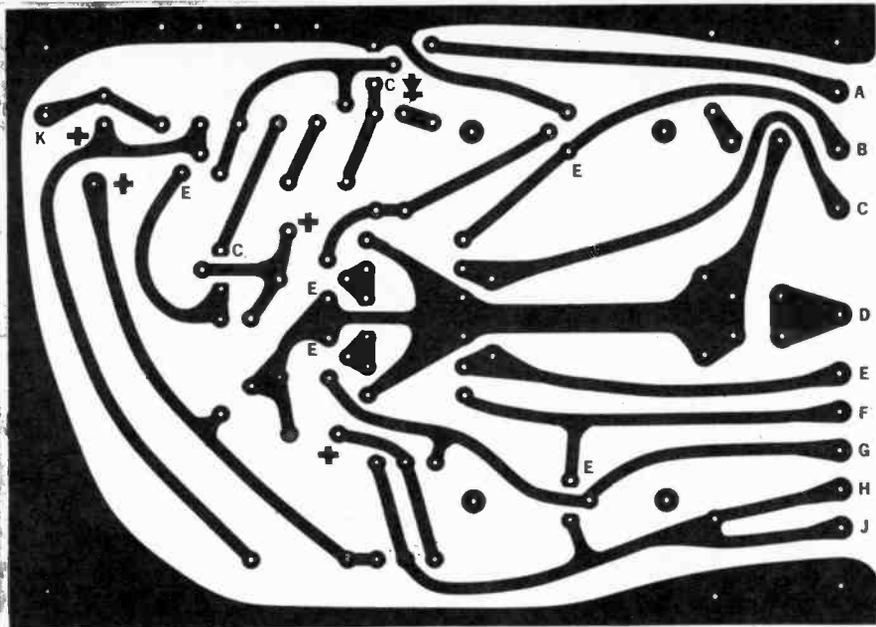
Foil pattern for the Super Tiger. Like the Tiger PC board, this one is also available etched and drilled (see Parts List for Fig. 5).
